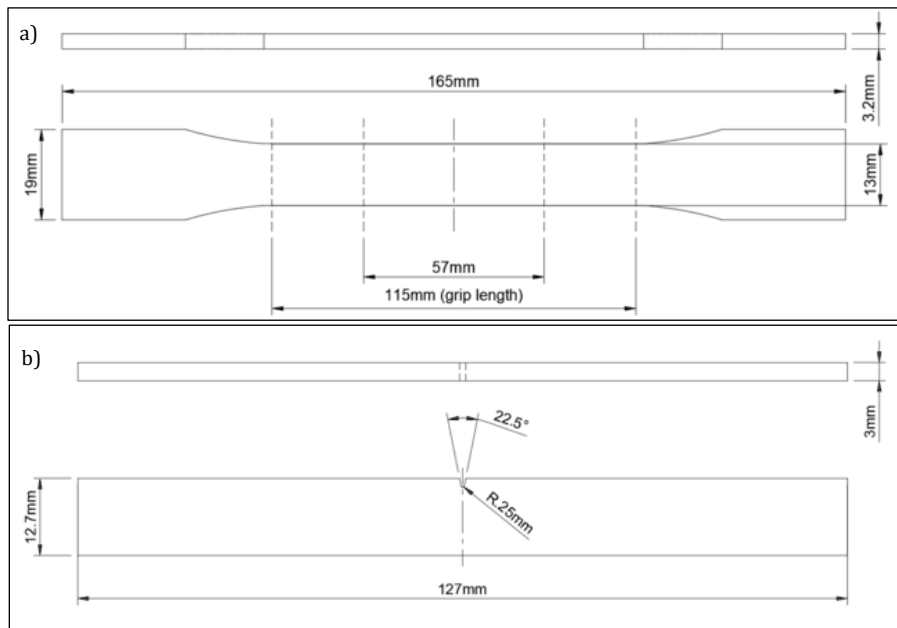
Dimension size of samples for (a) tensile test and (b) impact test.
